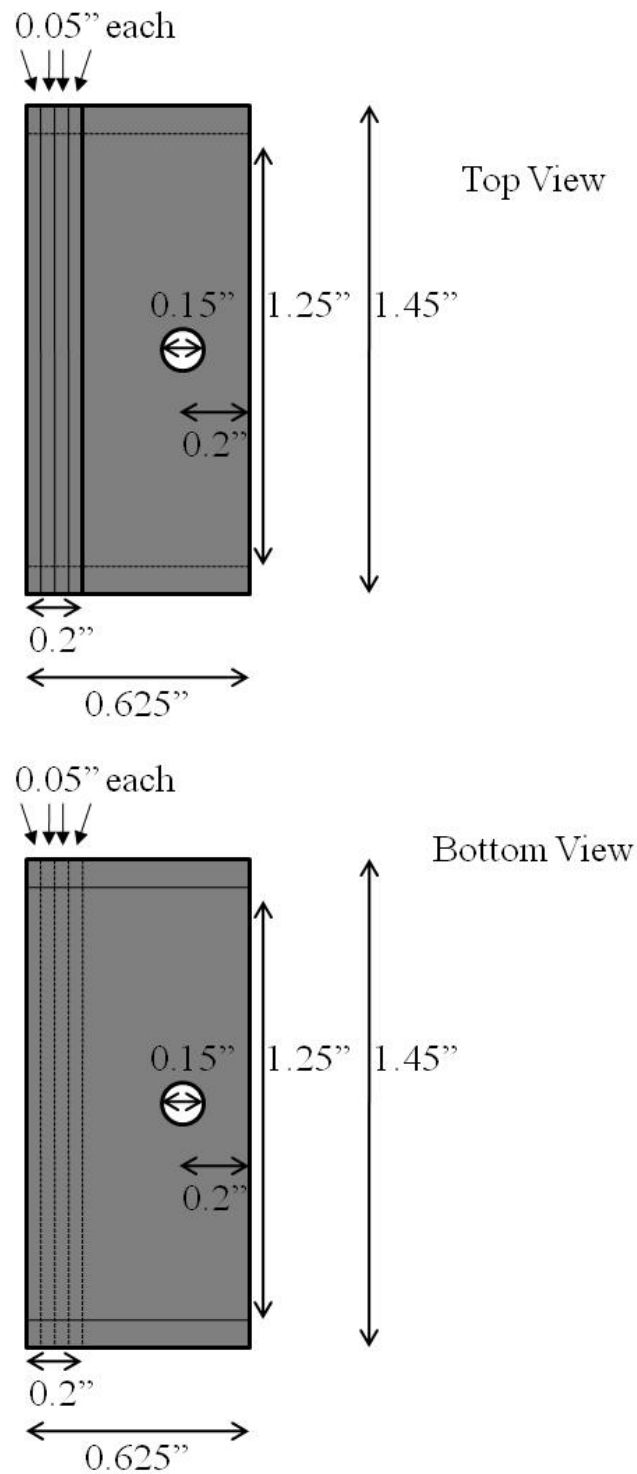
Schematic (top and bottom view) of slider component for four point bend apparatus.
